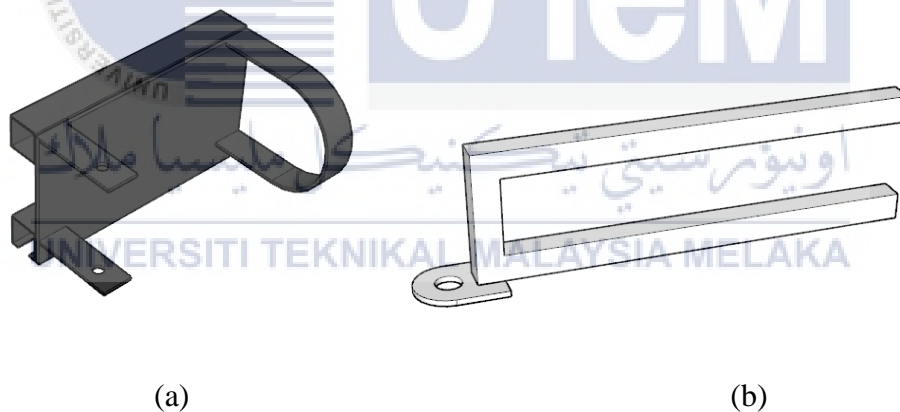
(a) Grinder holder and (b) Grinder connector.
